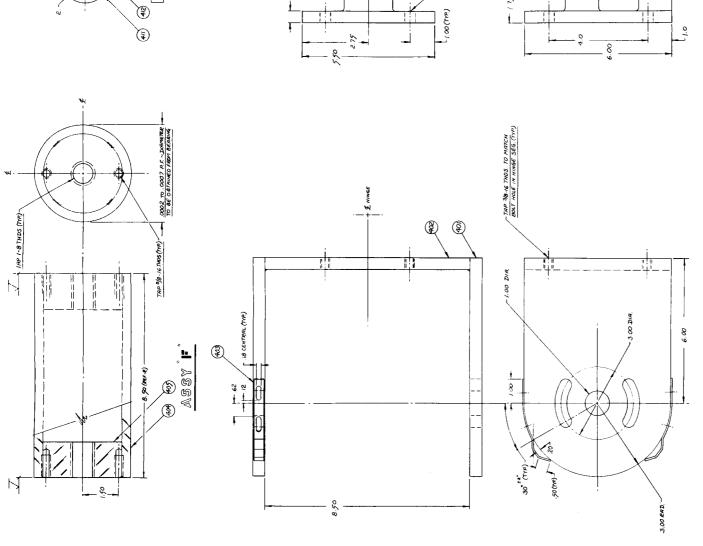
Sheet 3. Coil Adaptor Assembly and Transportation Dolly 34
